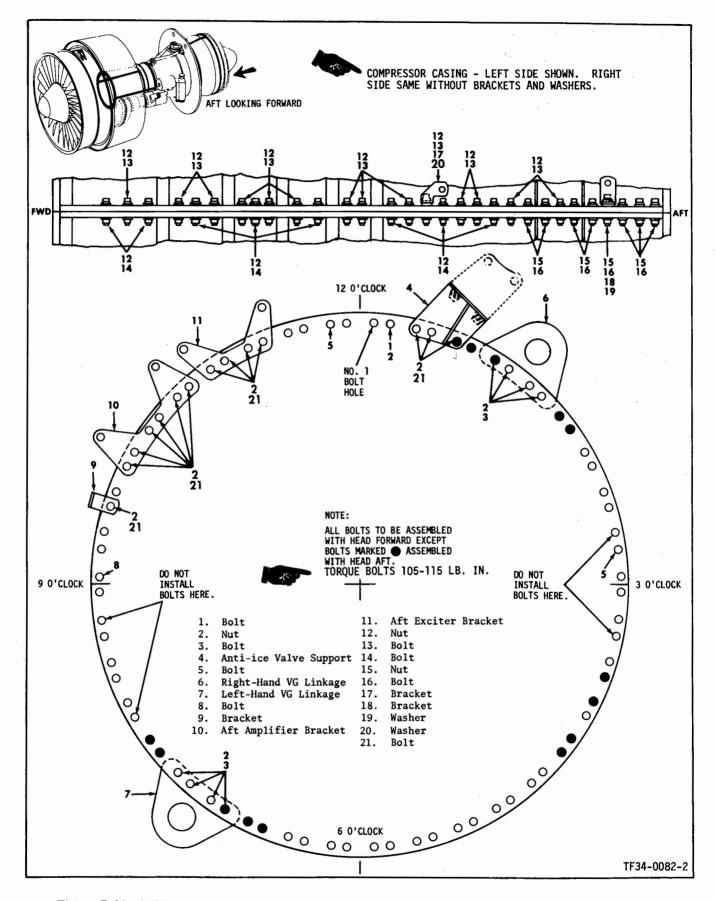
Bolting Diagram - Compressor Casing-To-Front Frame and Compressor Casing Splitline
